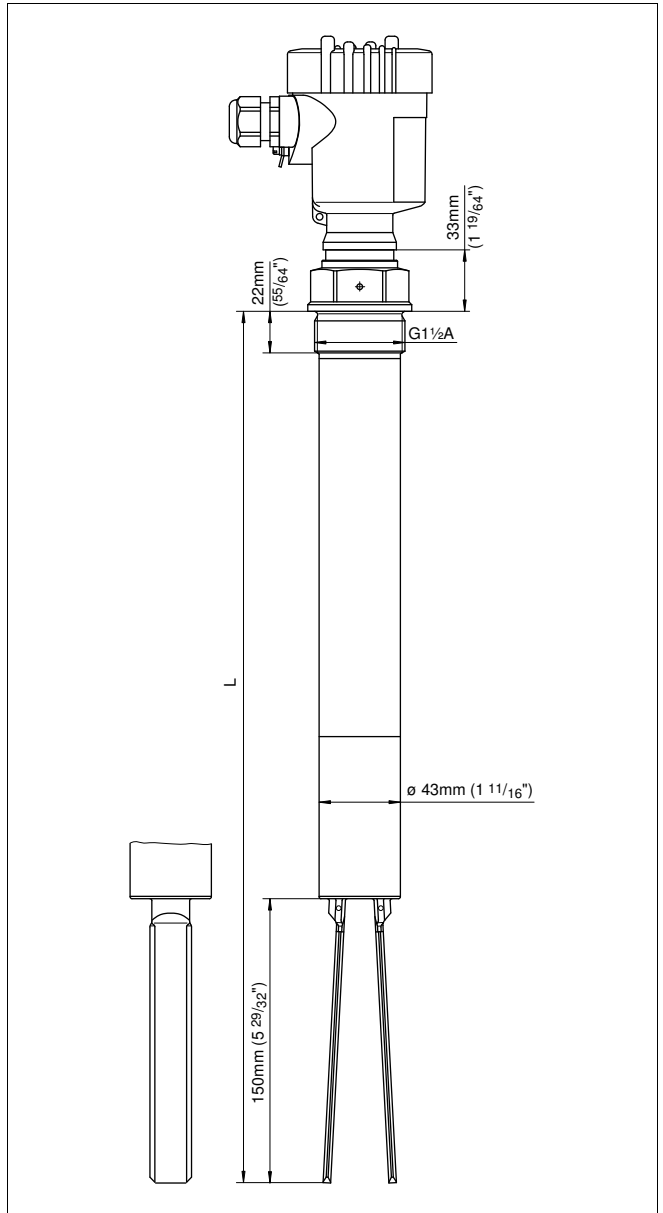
VEGAWAVE 63, threaded version G1½ A (DIN ISO 228/1)
